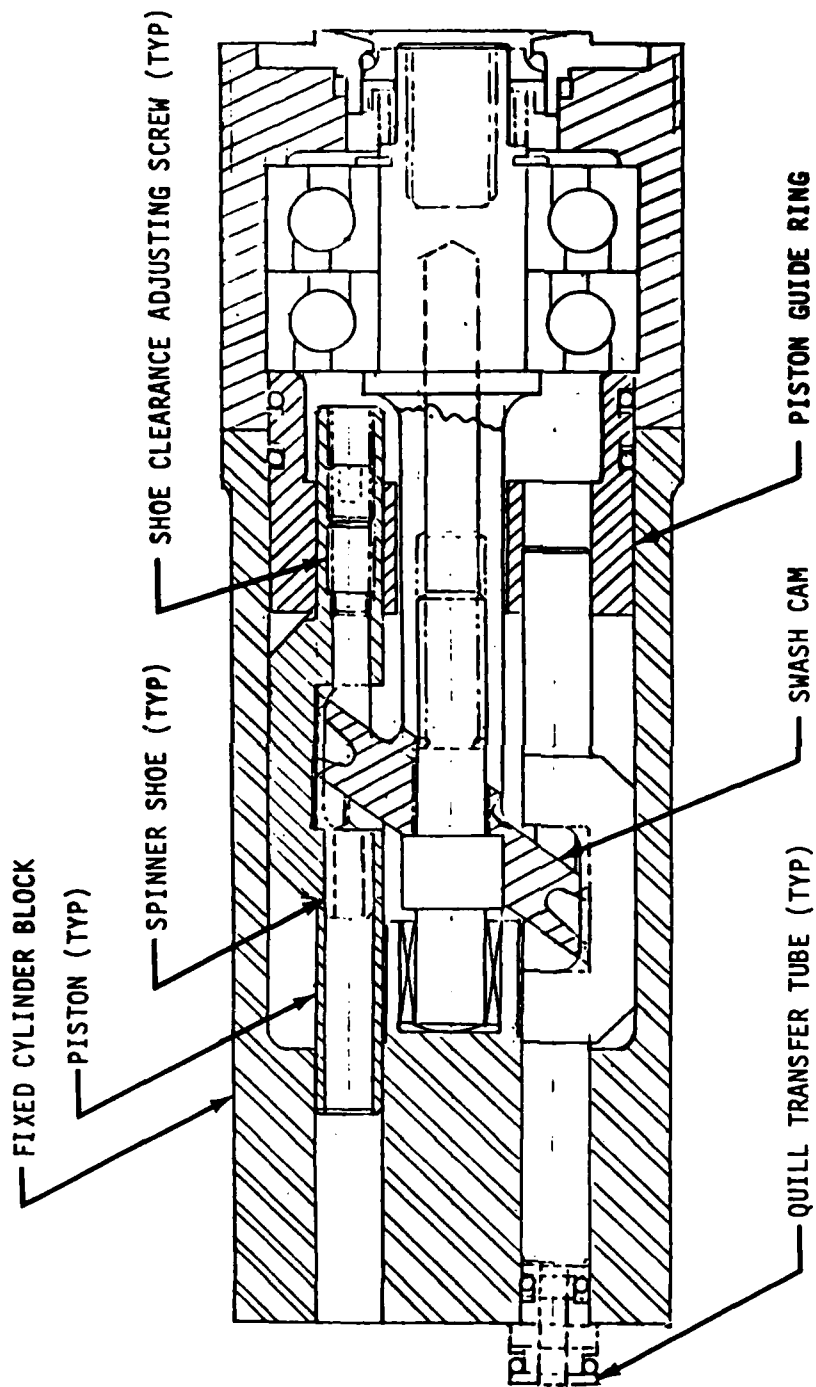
Thirty-five degree six-piston hydraulic motor with rotating piston shoes
